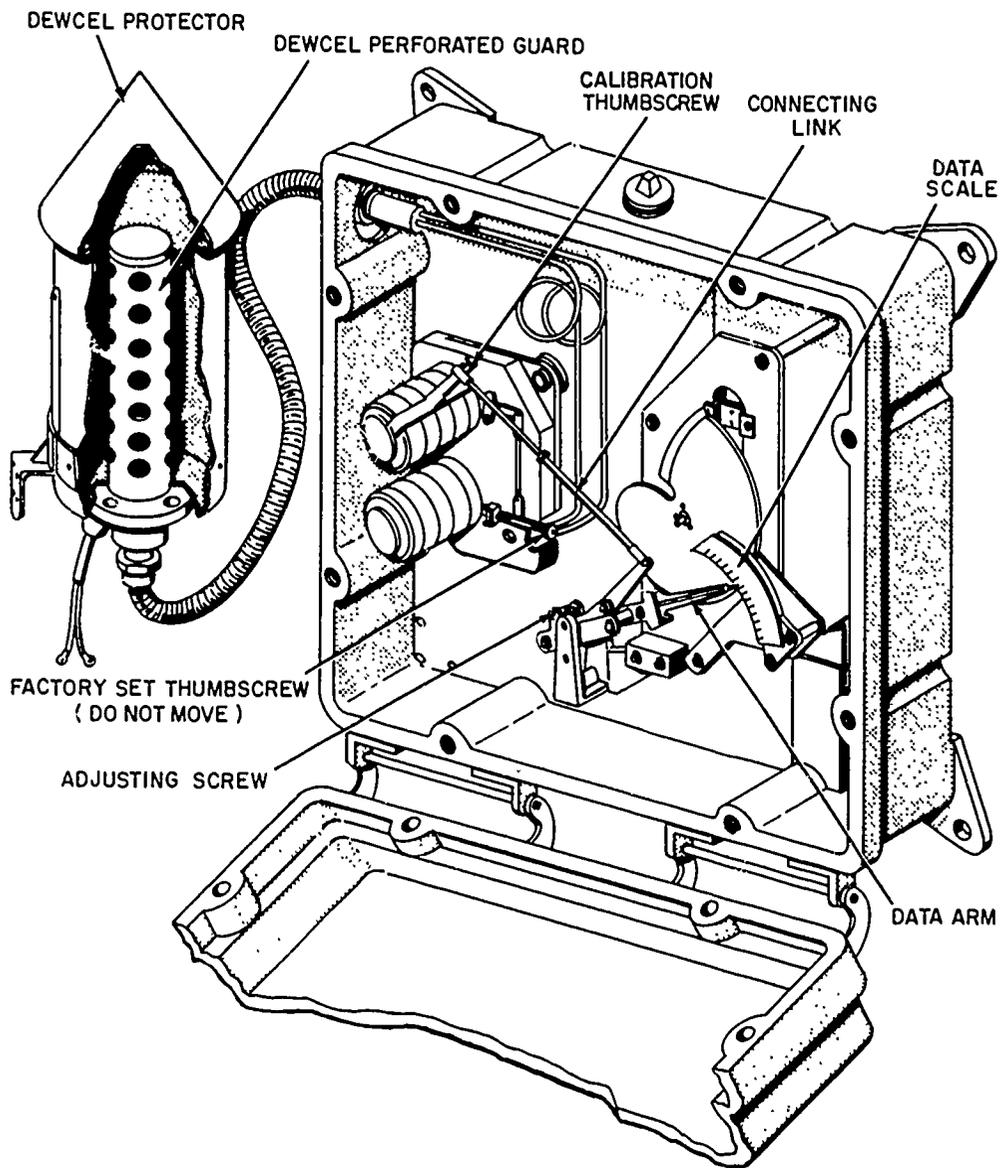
Dewpoint transmitter and dewcel assembly.
